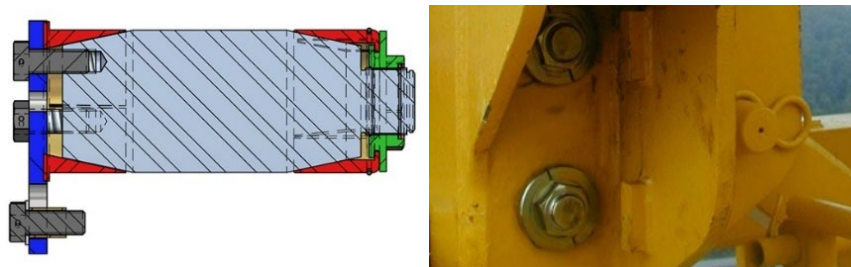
Bondura PIN technology (a) Expanding pin solution (b) Expanding pin in a joint
